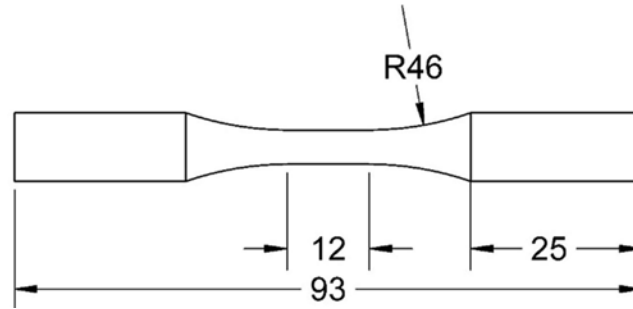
Geometry and dimensions of L-PBF Ti-6Al-4V fatigue specimen used in this study. All the dimensions are in mm.
